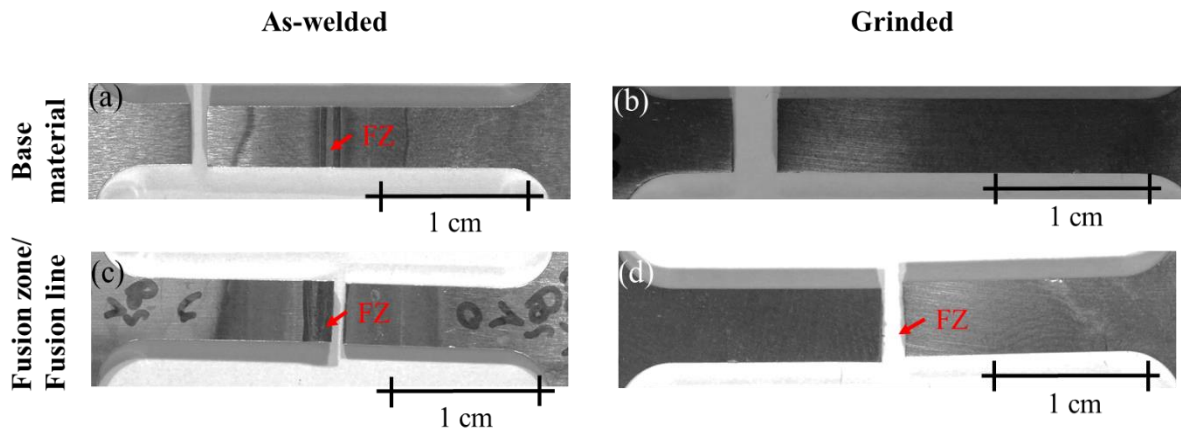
Fracture position of similar TNM joints tested at RT and welded with $P=4.5$ kW, $v=3$ m/min, $T_{ph}=800$ °C. (a), (b) Fracture in BM. (c), (d) Fracture at FZ or FL.
